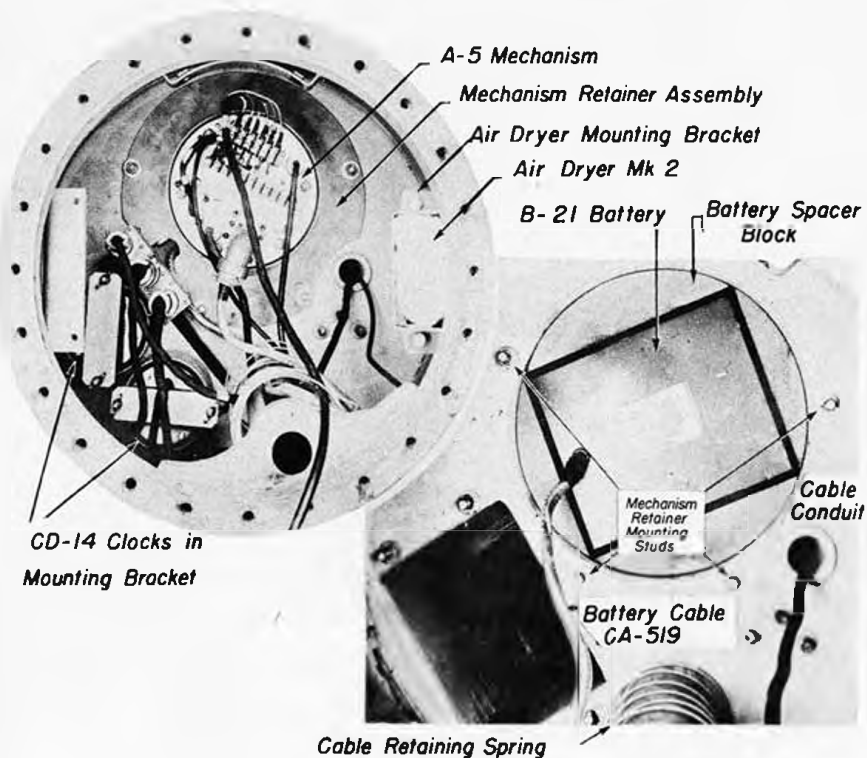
Mk 25-1 Mine, Mechanism Compartment Assembly
